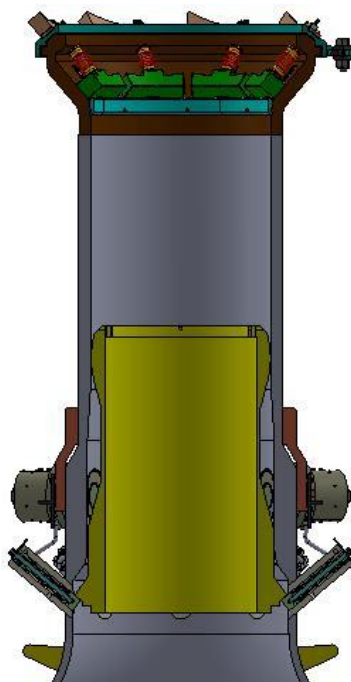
Unified Diverless Support Tube Assembly main parts for flexible riser
